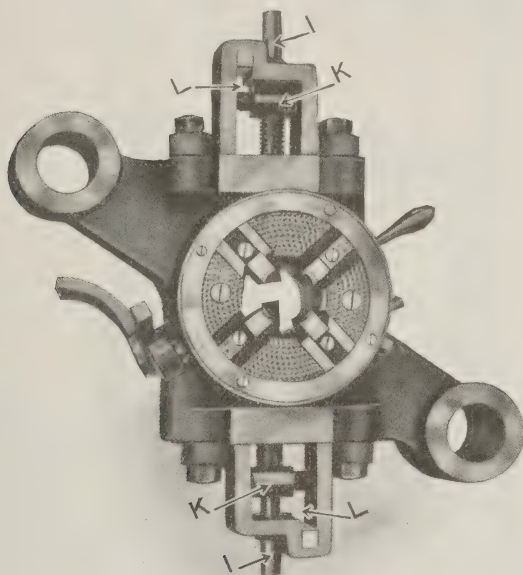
DIE HEAD FOR THREADING STAYBOLTS
